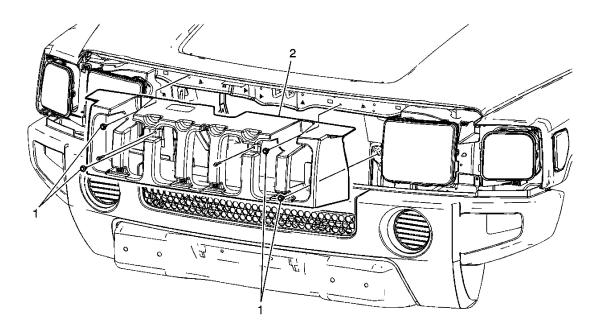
Radiator Grille Reinforcement Support Replacement Courtesy of GENERAL MOTORS CORP.
